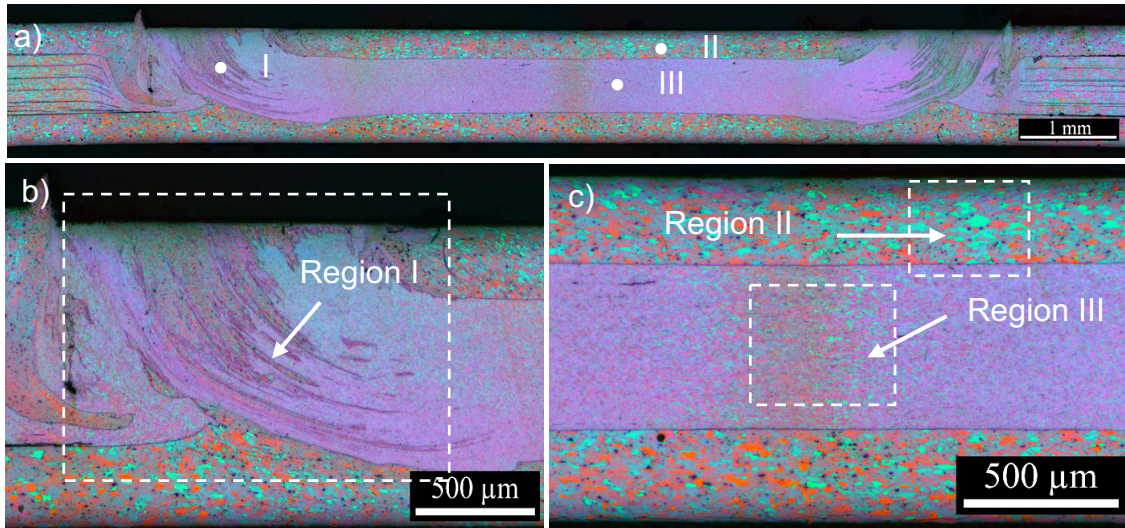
(a) cross-section of multilayered weld processed with the baseline condition: RS=1700 rpm, PS=2.1 mm/s, and PD=0.7 mm. (b) and (c) represent higher magnifications of the cross-section at the region penetrated by the adjustable shoulder and at the center of the weld, respectively.
